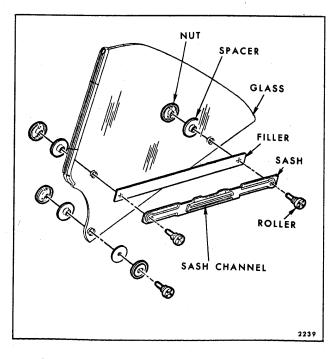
Rear Quarter Window Assembly - "X-37" Style
